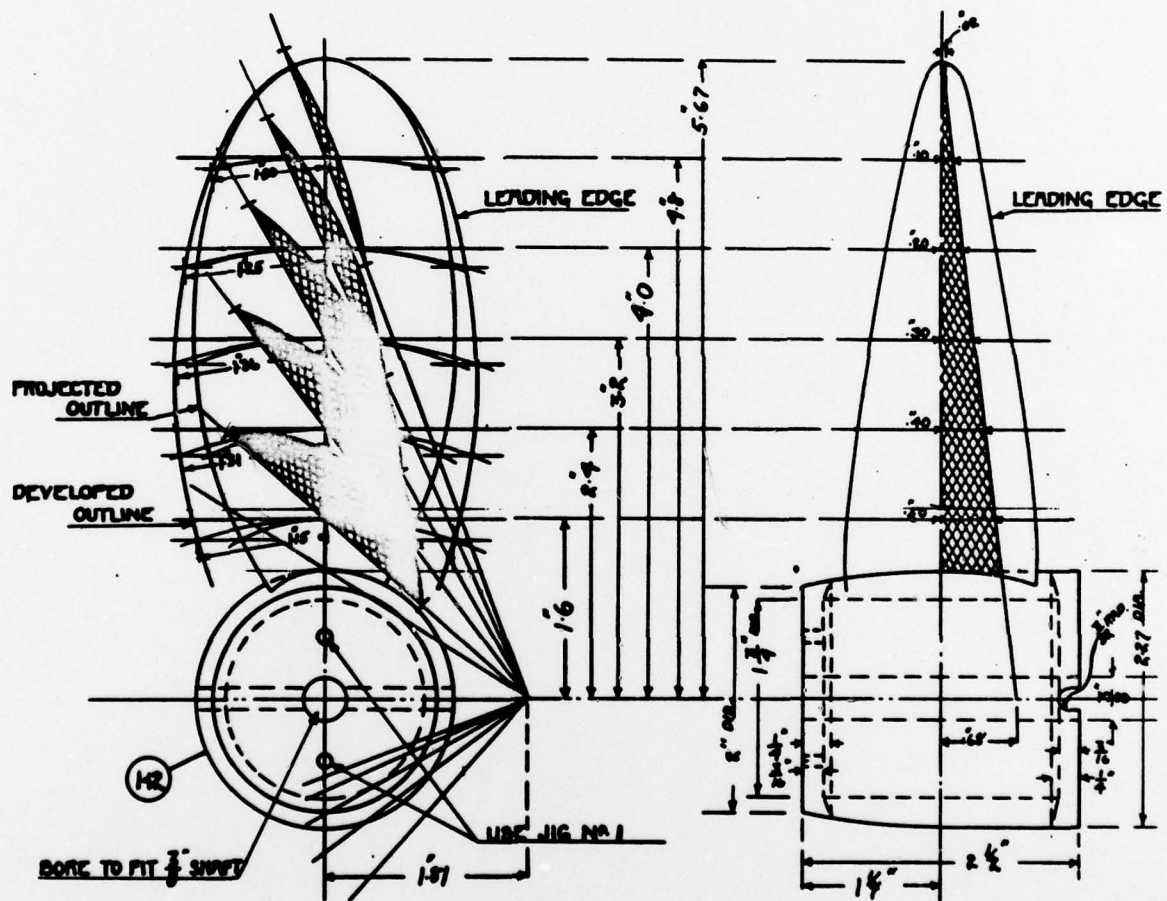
Propeller Drawings and Dimensions Representing Model Propellers 585 and 586
